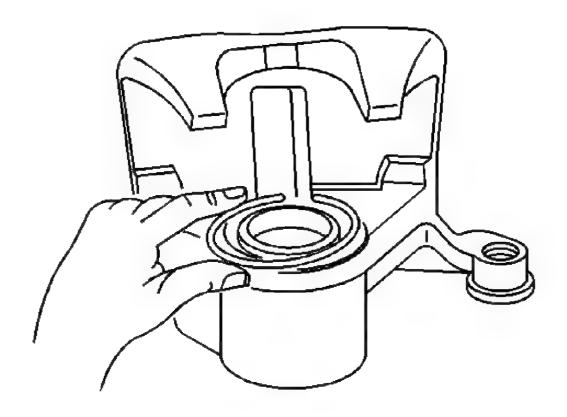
View Of Dust Boot Retaining Ring Courtesy of GENERAL MOTORS CORP.
